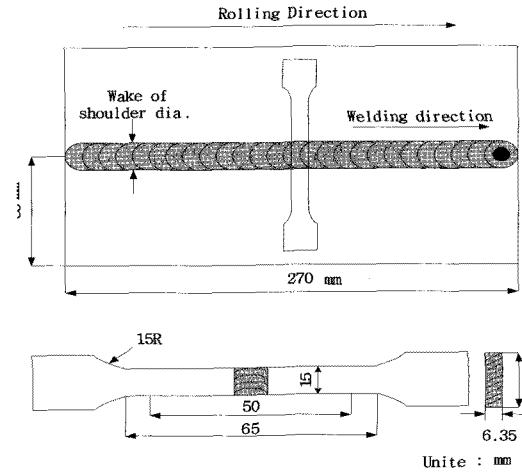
Schematic of friction stir weld working direction and tensile test specimen
